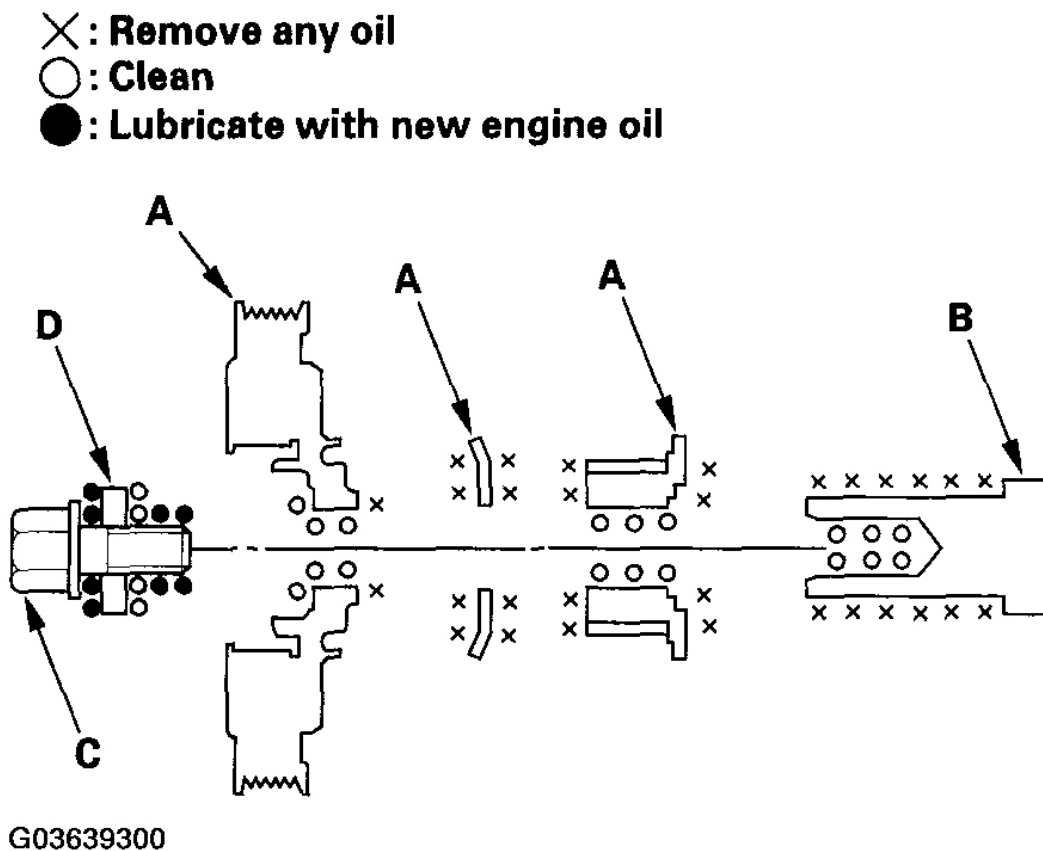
Removing Oil Or Cleaning Crankshaft Pulley
